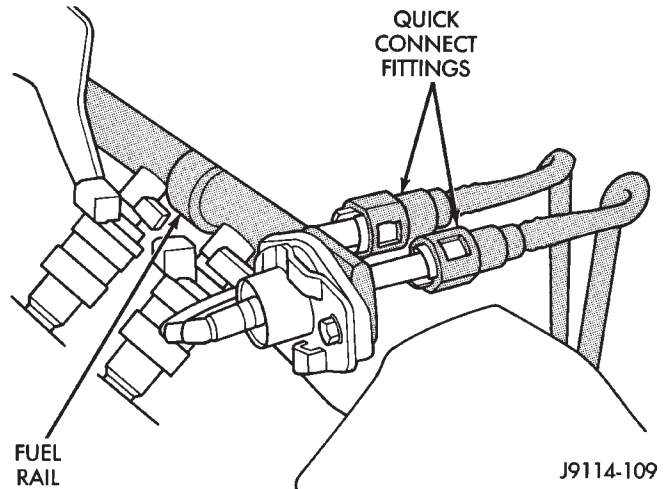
Tab Type Quick-Connect Fittings—Typical DISASSEMBLY
